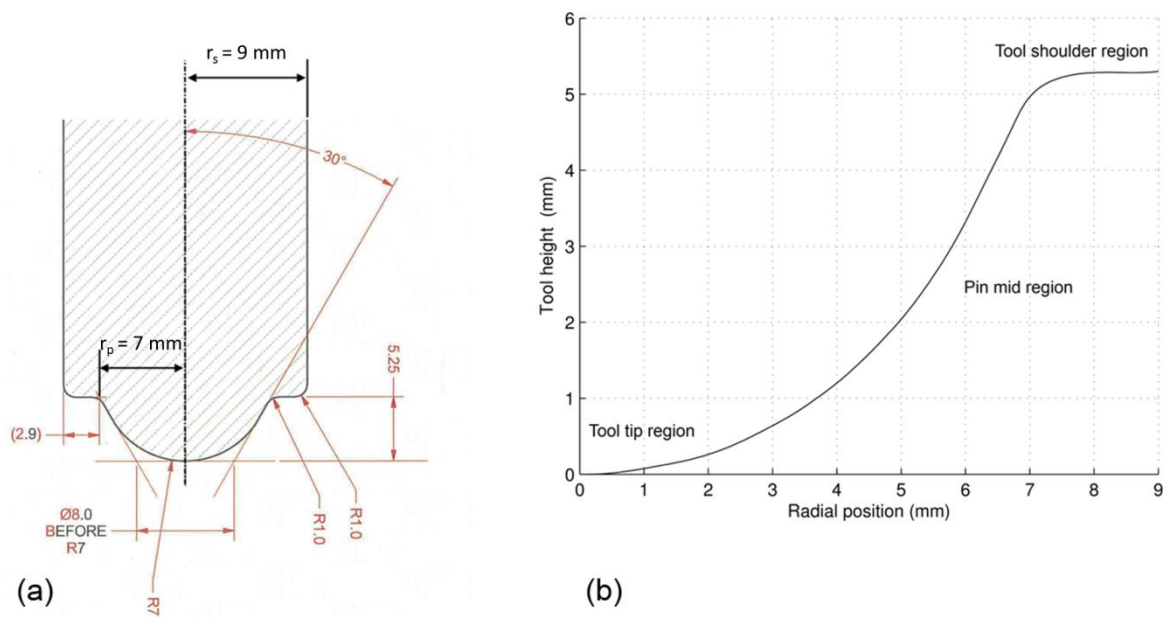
Tool geometry used in the study, (a): tool dimensions, (b): tool regions.
